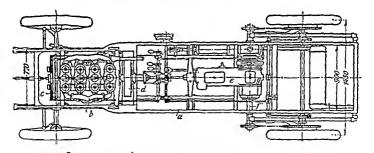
PLAN OF 4-CYLINDER PETROL MOTOR, CHAIN-DRIVEN
